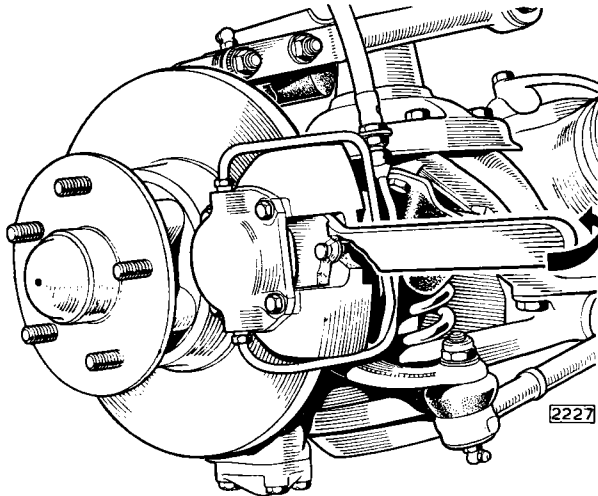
Pressing the caliper piston back using special tool No. 7840
